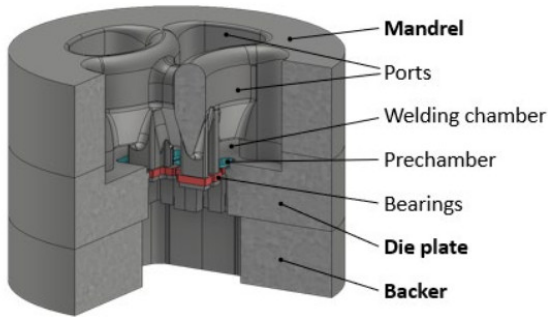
Simplified representation of porthole die set for aluminium profile extrusion [14]
